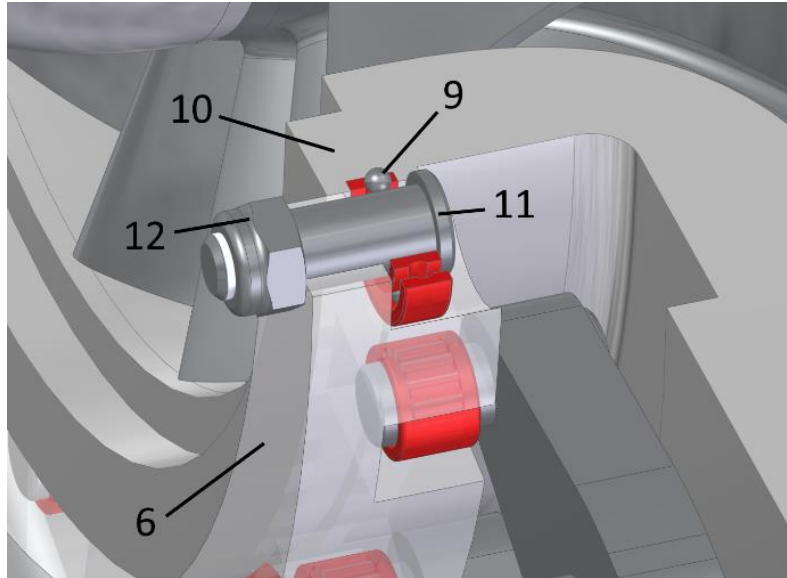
Section through the VVD adjustment mechanism, where: 6 – adjusting ring; 9 – bearing; 10 – impeller front cover; 11 – bolt; 12 – nut [image generated by the author]
